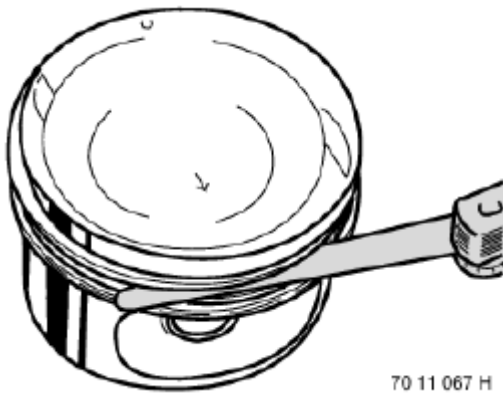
Measuring Axial Clearance Of Piston Rings In Piston Ring Groove
